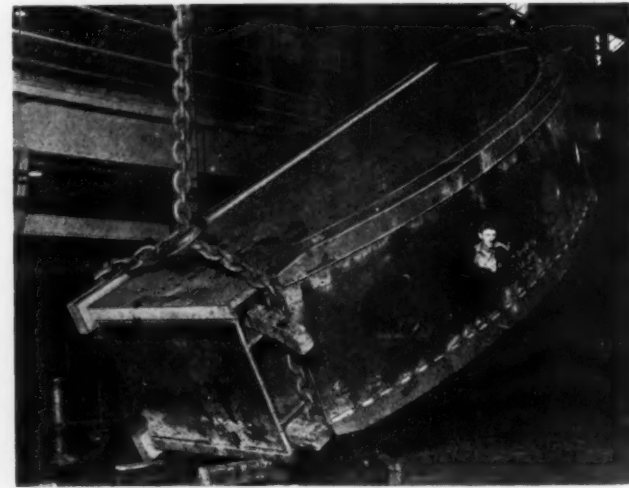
POSITIONING HEAVY PRESS BED FOR WELDING BY MAKING USE OF OVERHEAD CRANES
